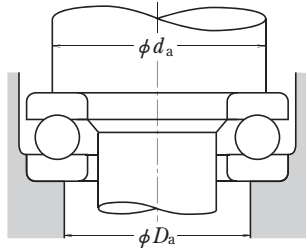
Face Supporting Diameters for Thrust Ball Bearings
